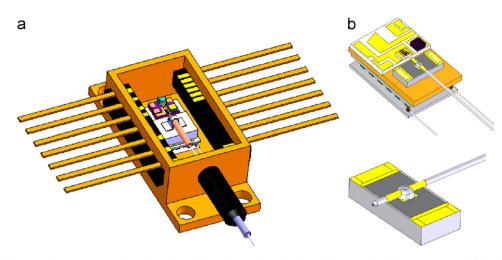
A schematic diagram of a 980 nm pump laser in a butterfly package where the lensed fiber was fixed by (a) a laser-welded clip, (b) a soldered joint.
